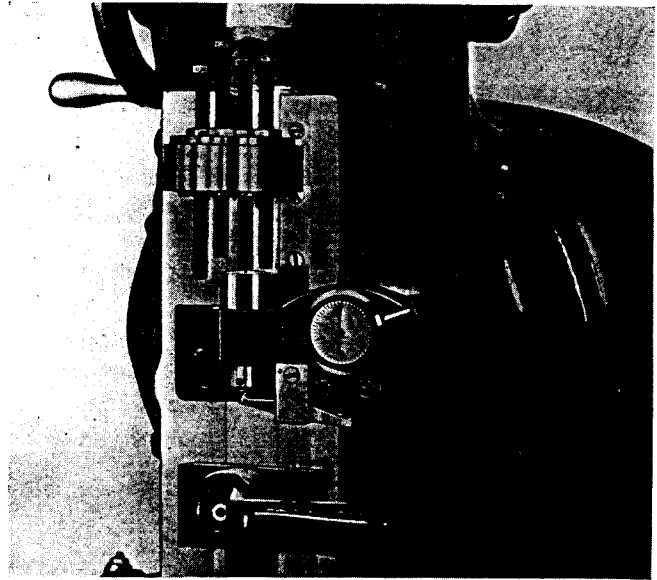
Turret Type Spindle Stop with Dial Test Indicator.
